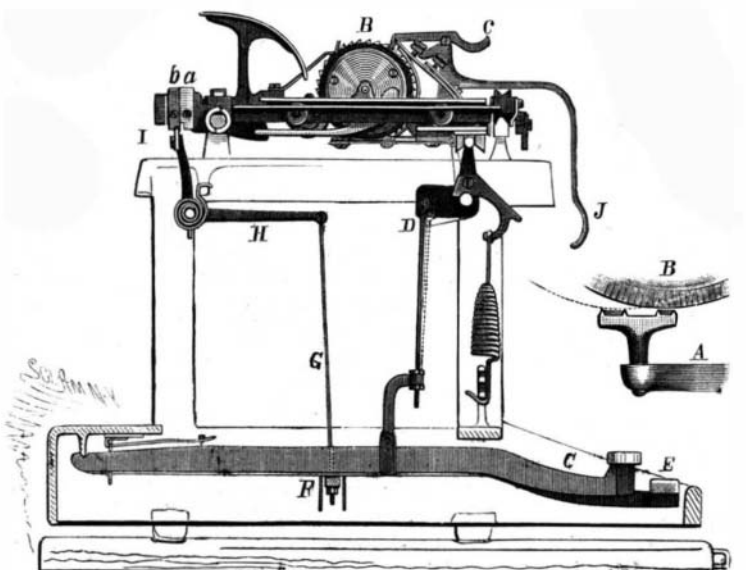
CARRIAGE SHIFTING MECHANISM.
